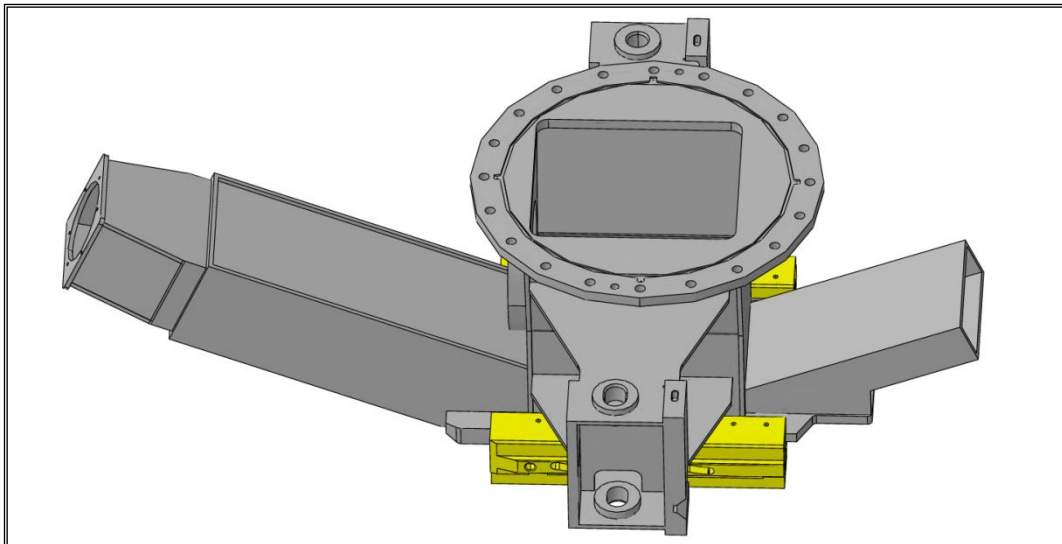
Mock-up 3D geometric model. Target Assembly and Back-Plate lateral view.
